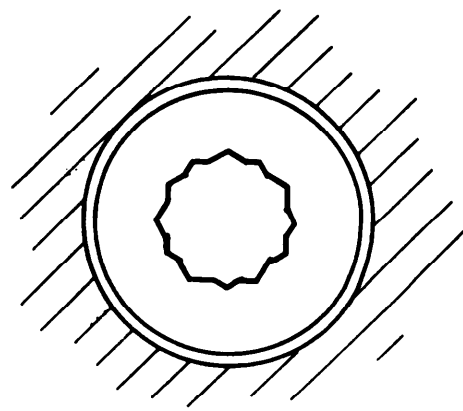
Improper Wrench Clearances (Ref. 31)
